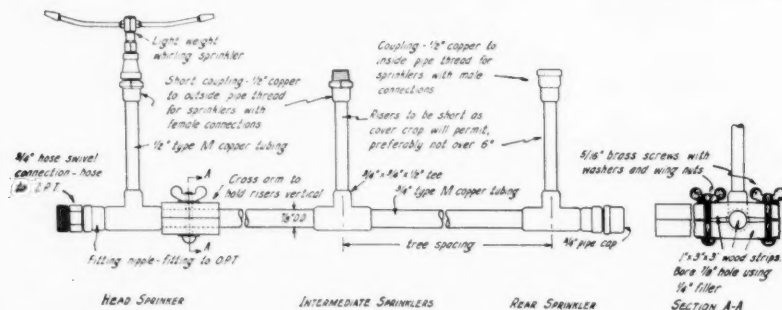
DETAILS OF PORTABLE DRAG-TYPE SPRINKLER UNIT, SHOWING ALTERNATE TYPES OF RISERS
